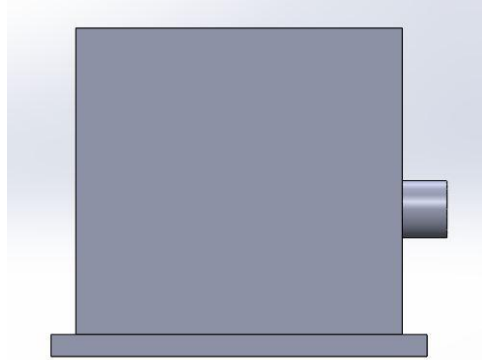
Air Inlet Pipe At 0°- Cooling Tower Model
